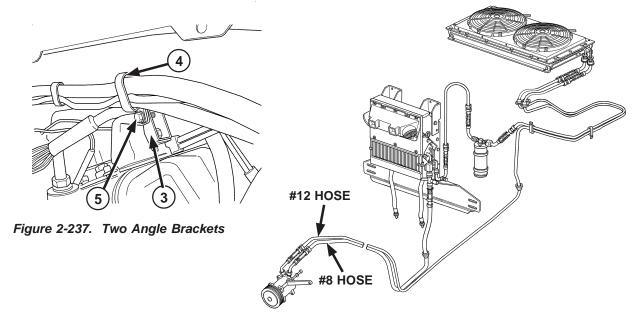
Refrigerant Hose Routing (#8 and #12)
